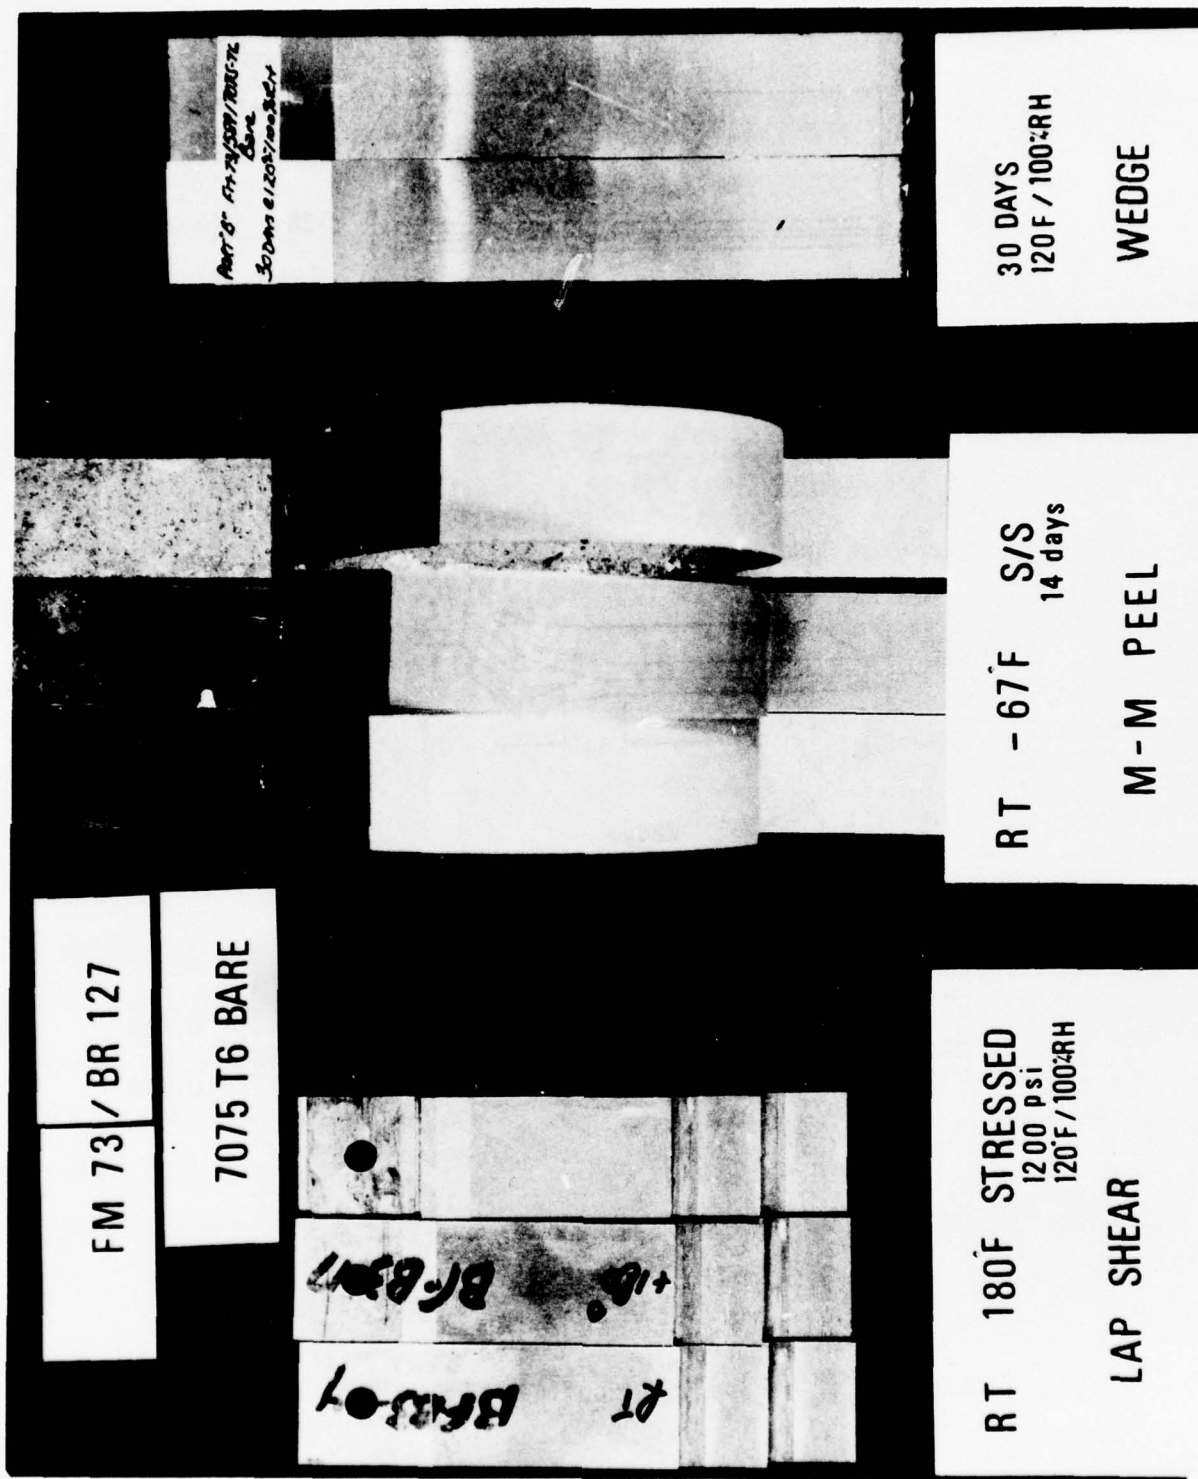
Specimen Bond Surfaces -- FM 73, 7075-T6 Bare
